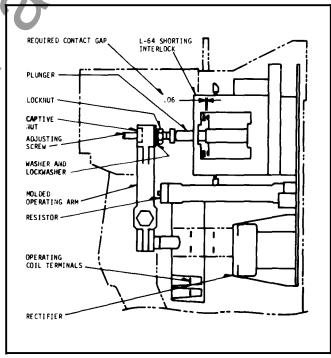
Adjustment of Type L-64 Shorting Interlock (From Dwg. 3512C85)
